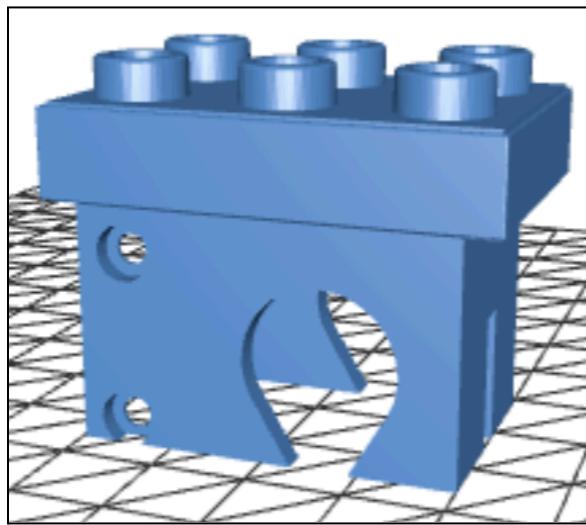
features an enclosure for a Motor. The block has holes for both screw and nuts to secure the motor to the mount. The 2x3 duplo on top makes it easy to connect to the bottom of the arduino enclosure (Figure 1). This model works well with the motor and other duplo blocks.
